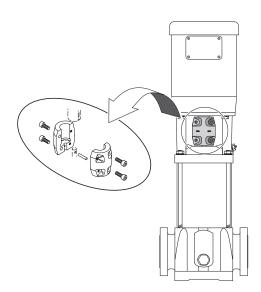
Remove the Socket Head Screws and the Coupling Halves
